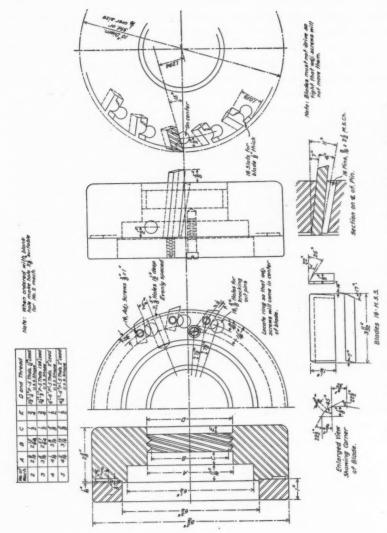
Ten-Inch Blade Face Mill for High-Power Machines
